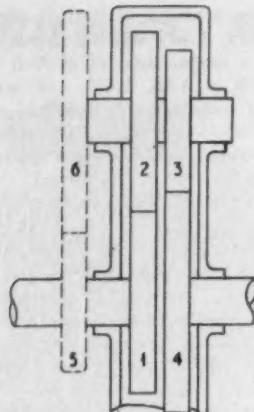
Diagram showing the fundamental principle of operation of an epicyclic gear train without ring or annulus gears and brake drums
